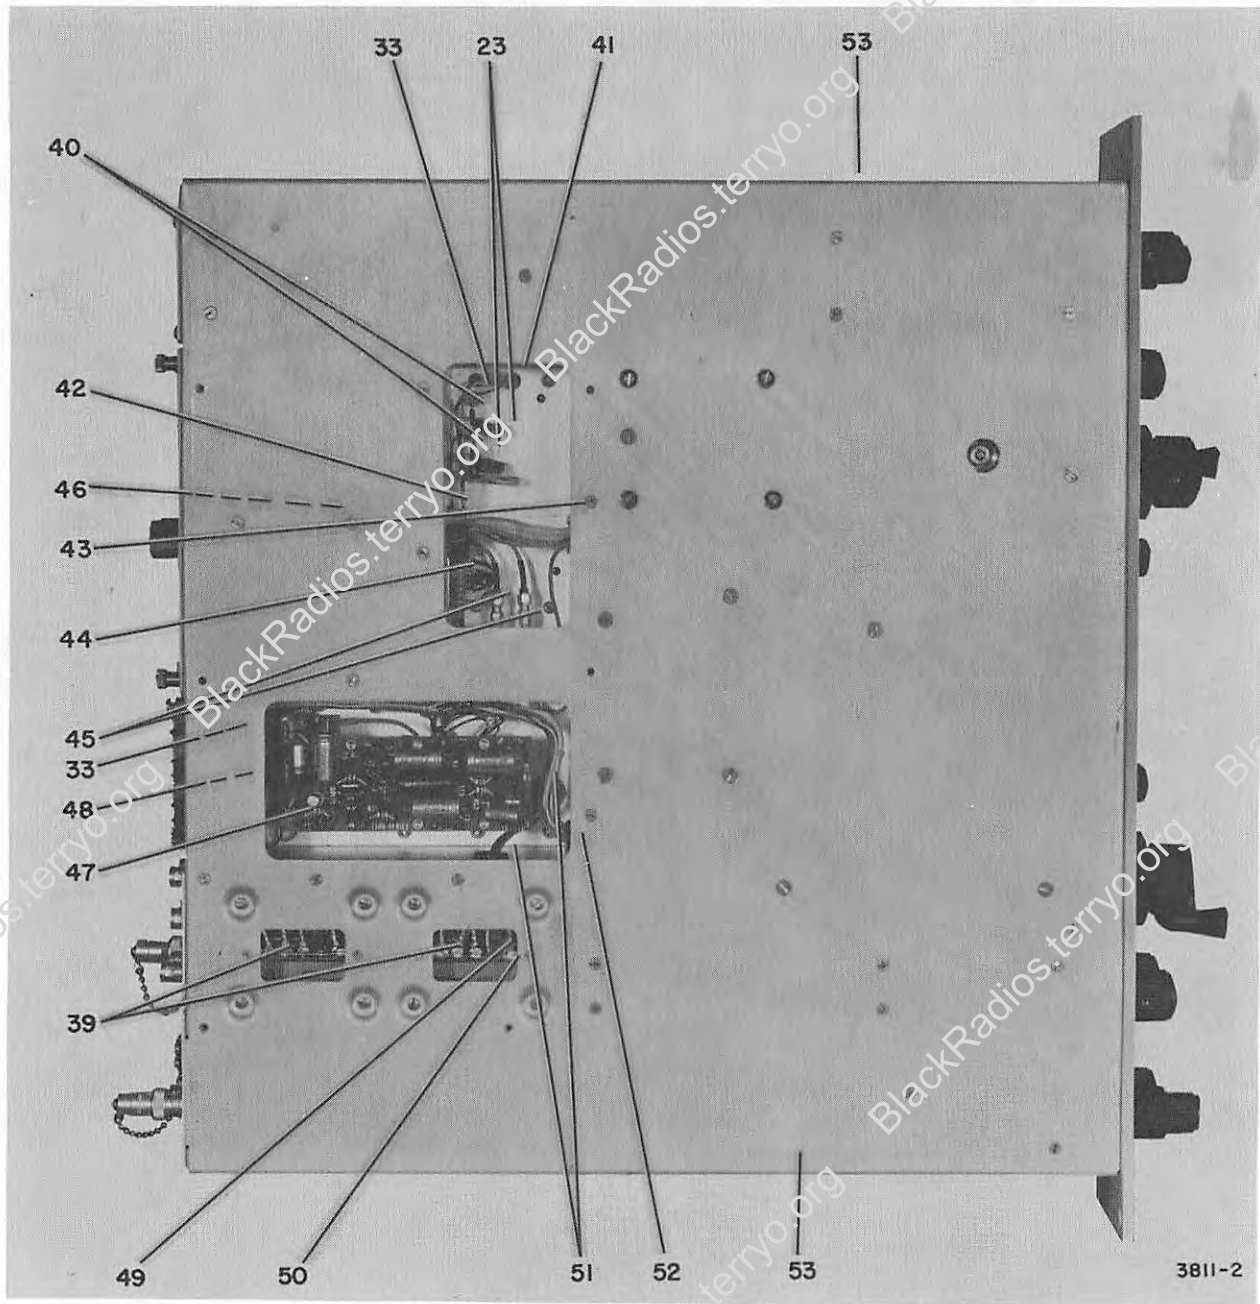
R1555/URR-62 BOTTOM VIEW, ACCESS PANEL REMOVED
